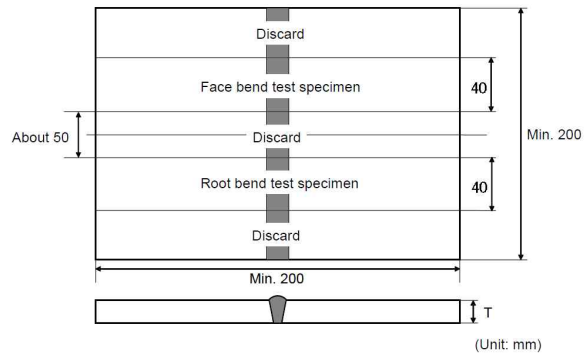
Dimensions and types of test assembly for butt welds
